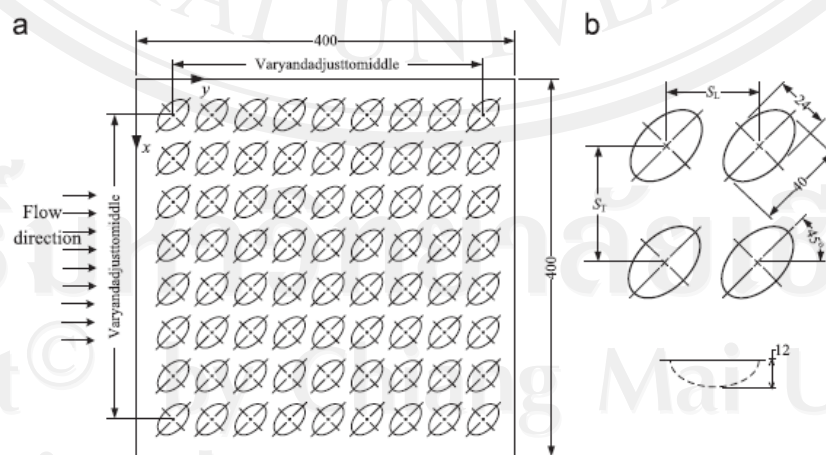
Details of (a) dimpled-tested surface for inline arrangement and (b) individual dimple geometry. All dimensions are in mm.
